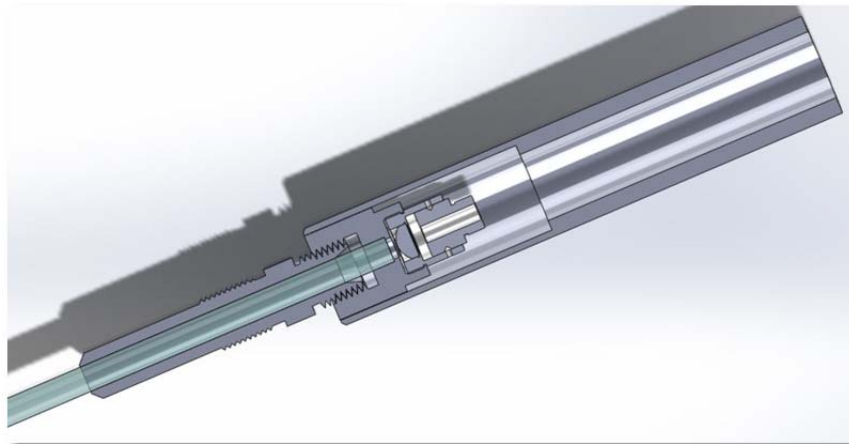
Section view of the complete sapphire rod assembly showing the rod, upper and lower housings and the sleeve.
